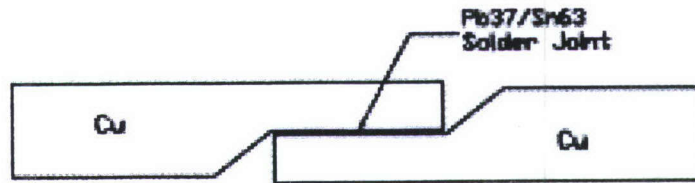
Specimen for fatigue shear testing for Pb37/Sn63 thin layer solder joints
